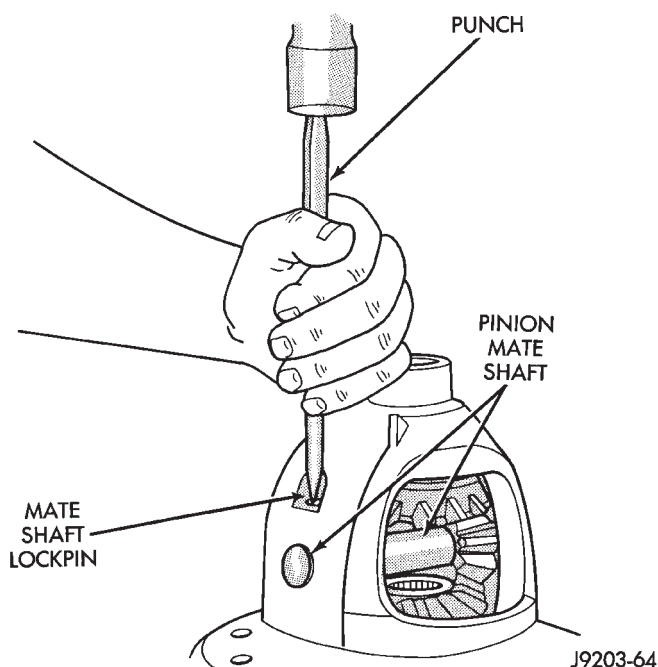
Pinion Mate Shaft Roll-Pin Installation
